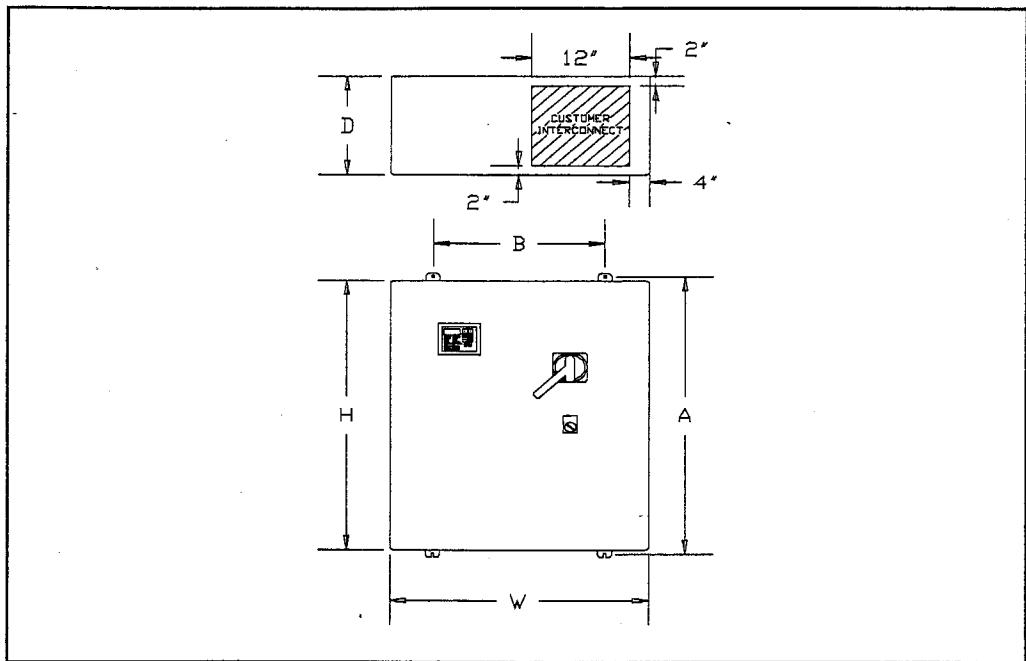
Wall Mount Option Style A Drive Dimensions (30-75 HP @ 208VAC/75-200HP @ 460VAC)
